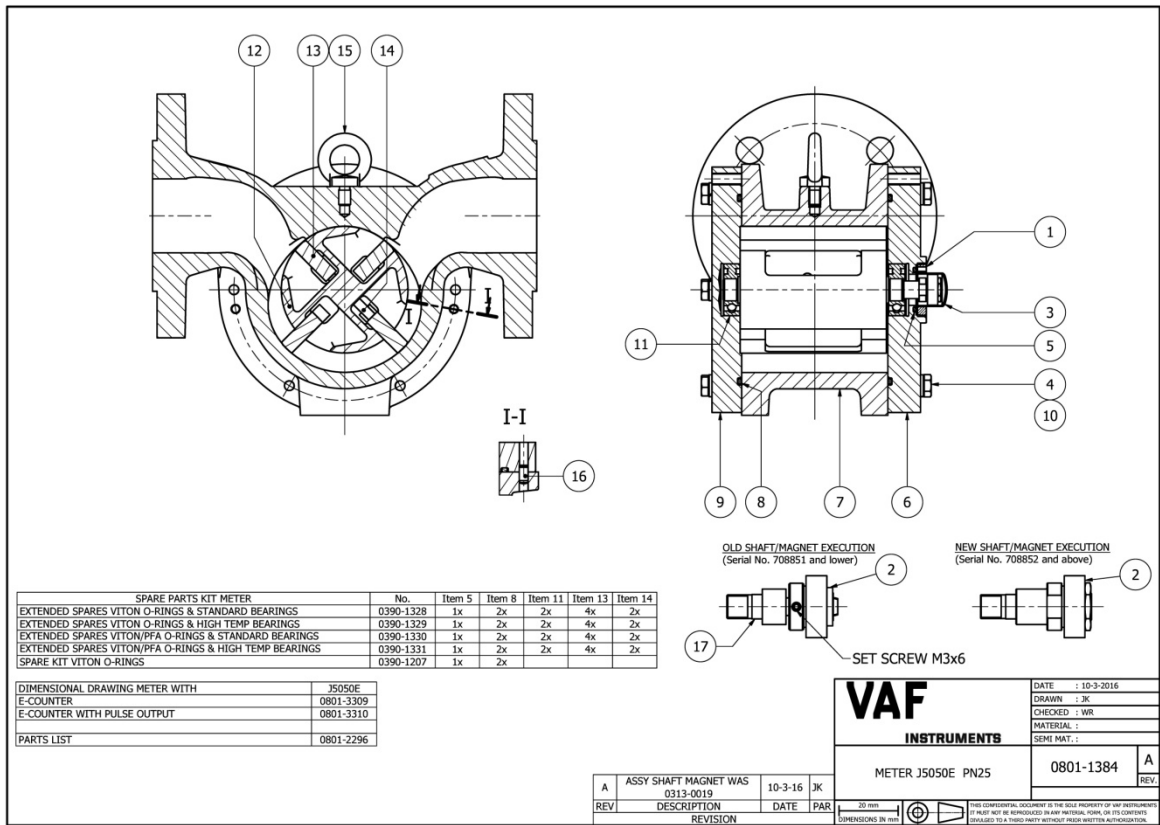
Drawing 0801-1384 – Meter J5050E PN25
